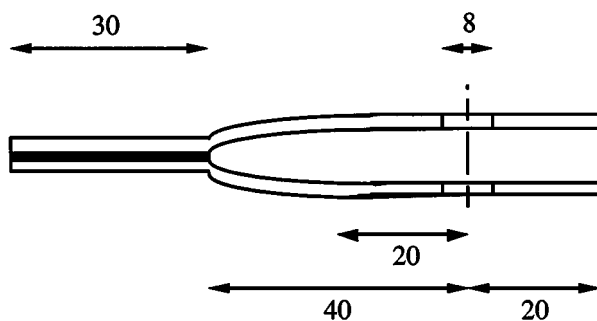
Imperial College specimen design. (All dimensions in millimetres.)
